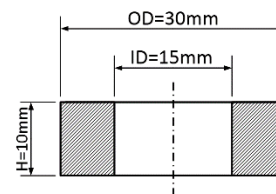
Al 6061/15%SiC_p composite ring specimen
